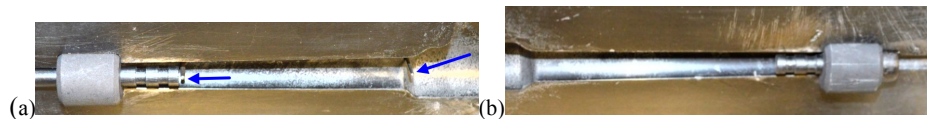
Picture of mold setup for load measurement type castings showing: (a) mold cavity for the RHS arm with the location of two thermocouples. The thermocouples were intentionally inserted in the mold cavity to their location for the temperature measurement castings, and (b) mold cavity for the LHS arm with the bushing used to fix the arm end.
